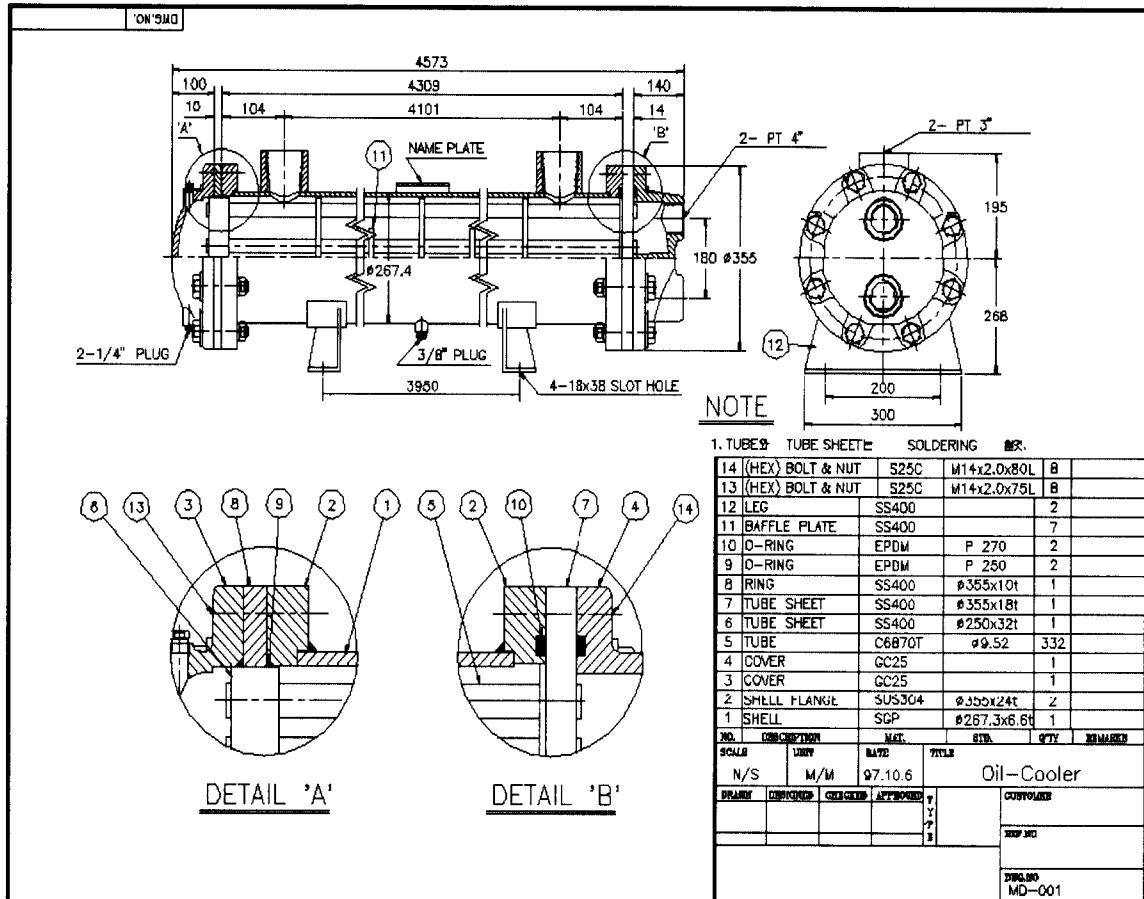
Drawing for actual manufacturing of heat exchanger in the case of divided tube sheet type
